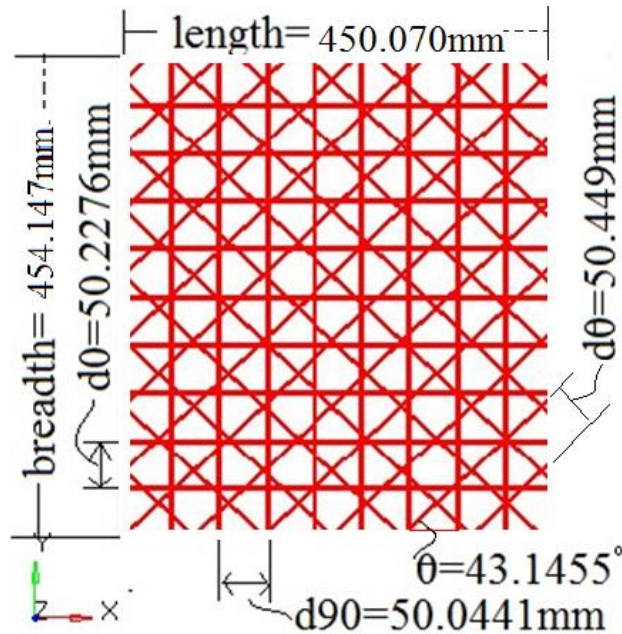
Dimensions of the QDG CAD model for Method 2
